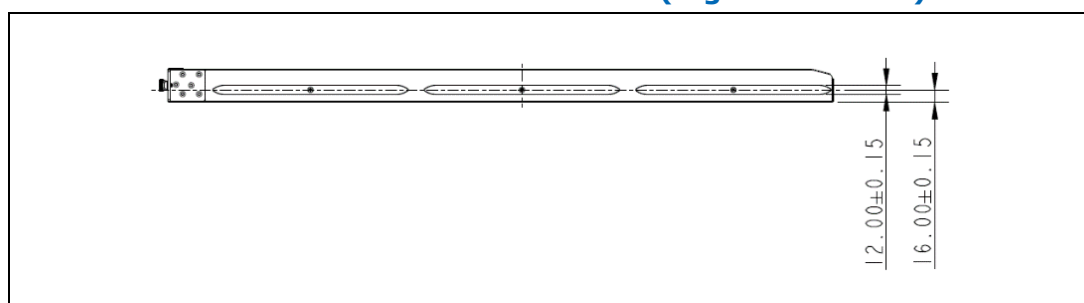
1U Server Chassis Dimensions with Ear (Left-Side View)
